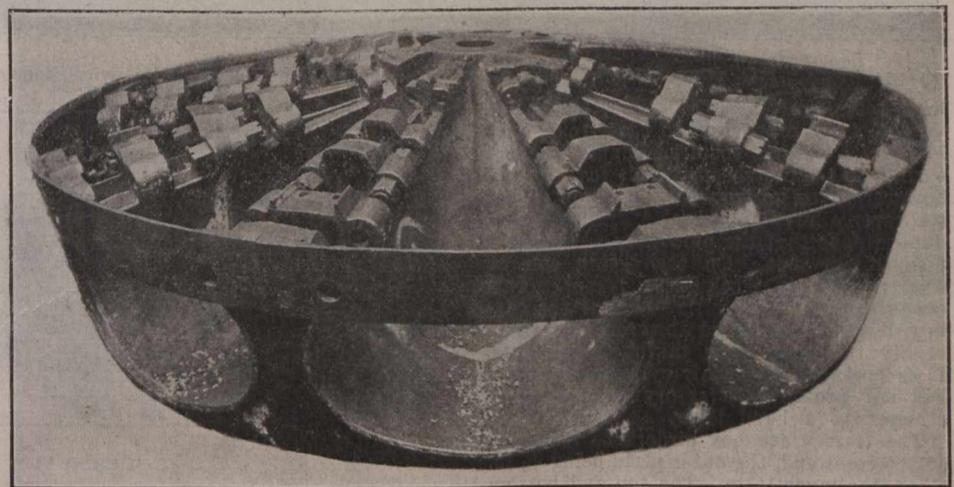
Assembled Cutter Head of New C.P.R. Snow Plow, Without Cutters.
